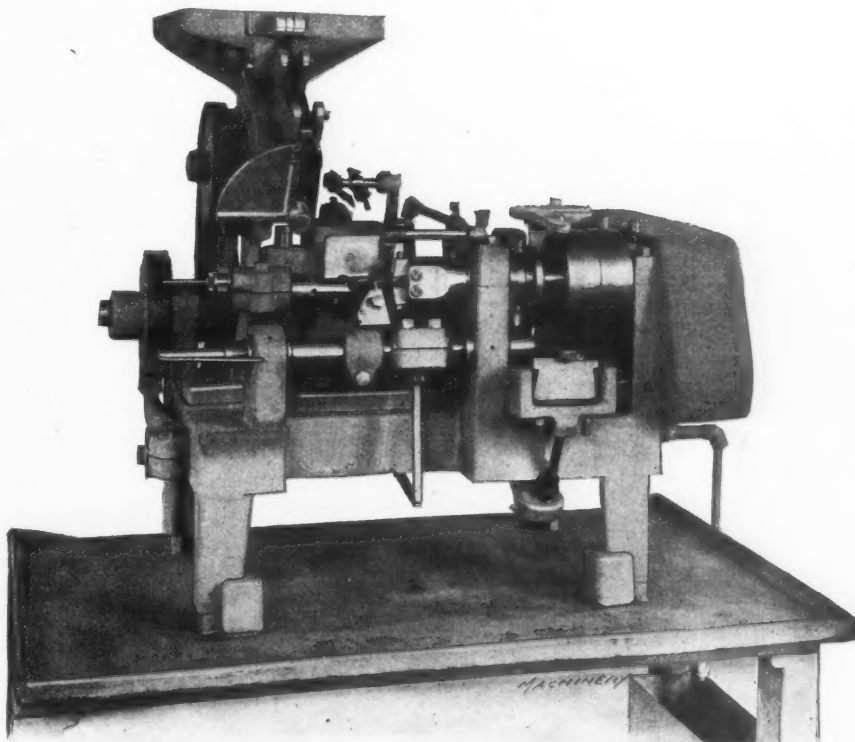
H. P. Townsend Screw Pointing and Threading Machine
